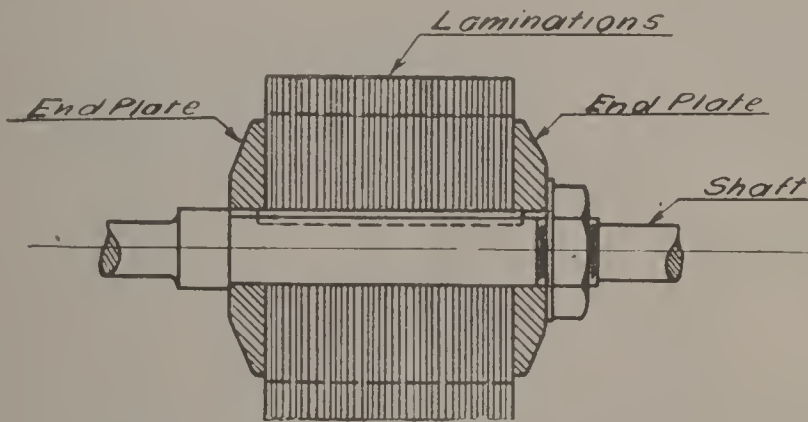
CROSS-SECTION DRAWING, SHOWING CONSTRUCTION OF SMALL ARMATURE CORE WITH PUNCHINGS MOUNTED DIRECTLY ON SHAFT.
